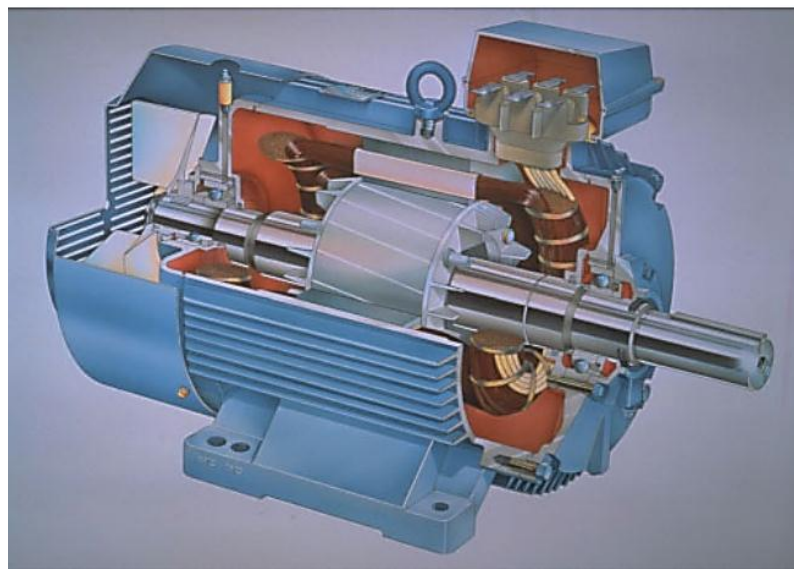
Cross section of the squirrel cage induction motor (Copyright granted, 2012, ABB)
